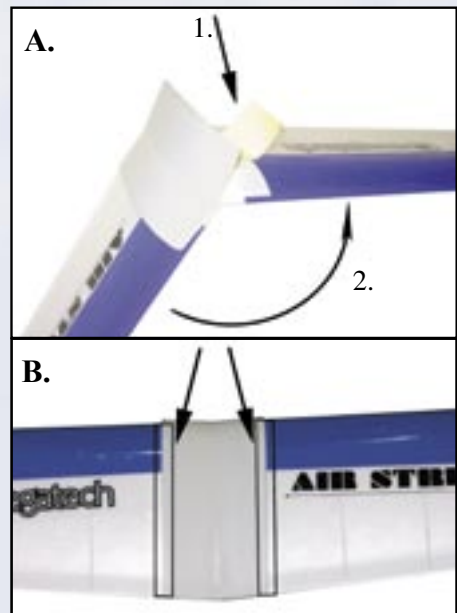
Remove tape backing and unfold wing. Apply clear tape to wing and center section.
